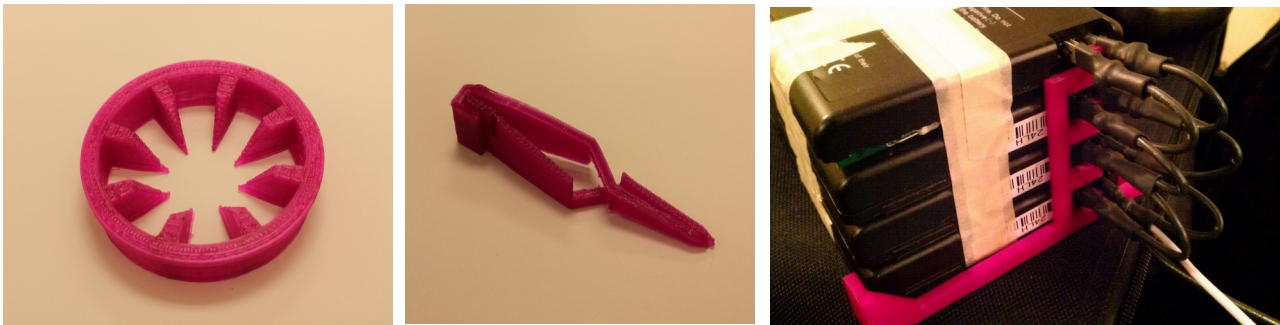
OSAT printed on the ultra-portable PV-powered open-source suitcase Foldarap 3-D printer a) avocado pit germination holder, b) cross tweezers and c) battery terminal separator.
